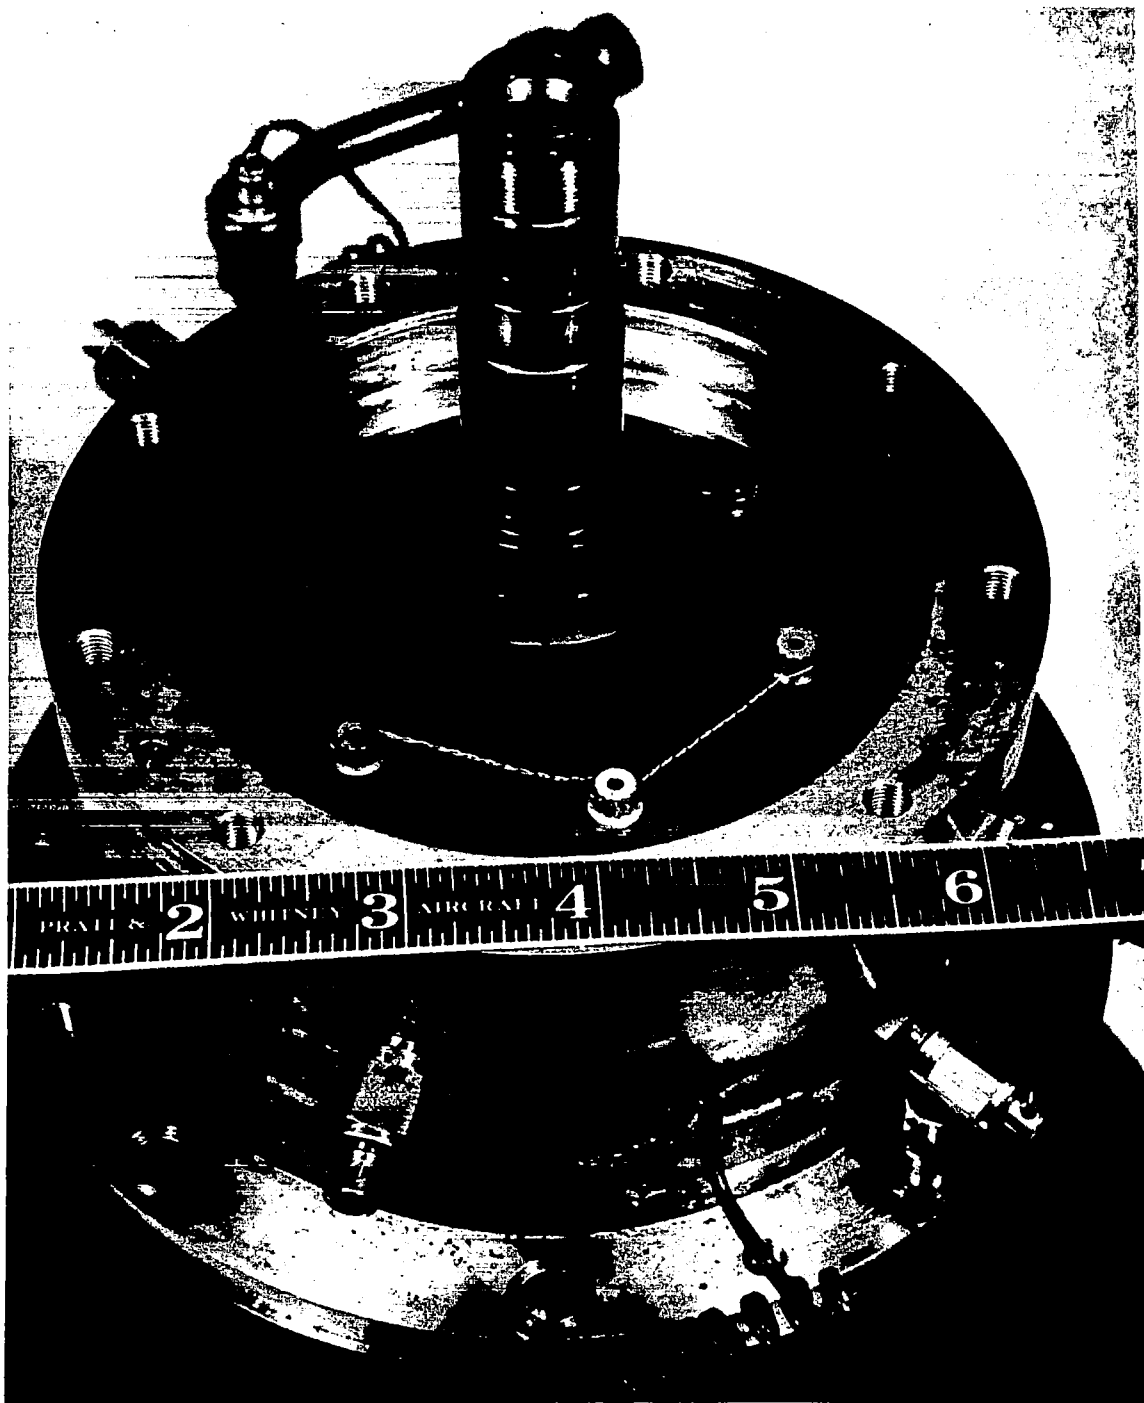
Powerplant Side of Turbine-Compressor Bearing Compartment
